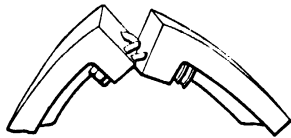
Method of failure of fly-wheels with flanged joints.
